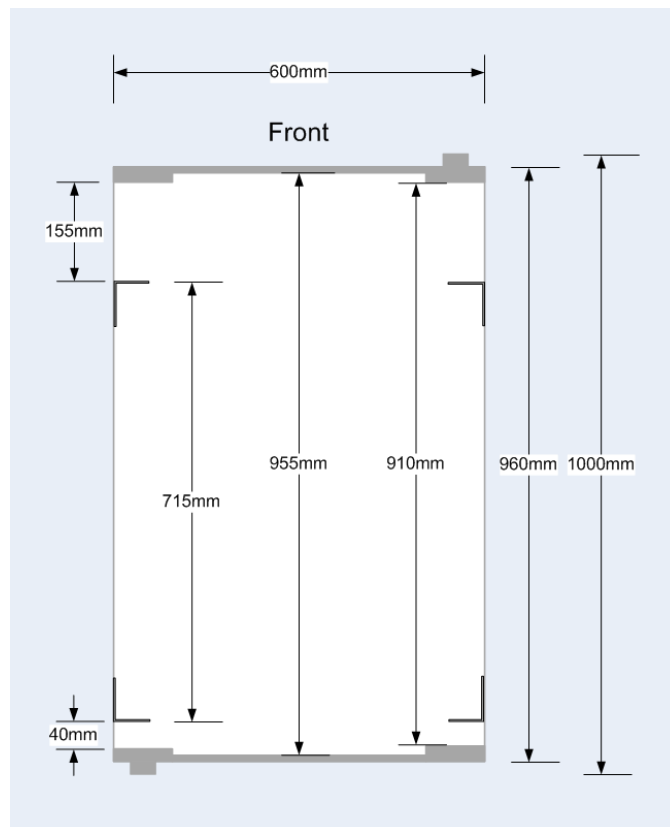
Plan view perspective of the default rack configuration with dimensions and clearances shown.
